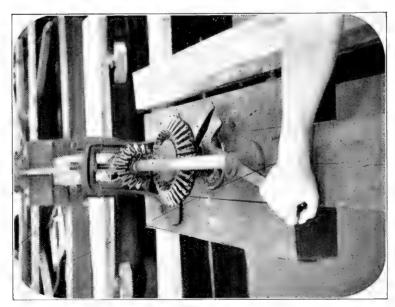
Detail of device for throwing propeller in and out of gear. By pulling the lever the propeller shaft and its gear drop as in fig. 22
